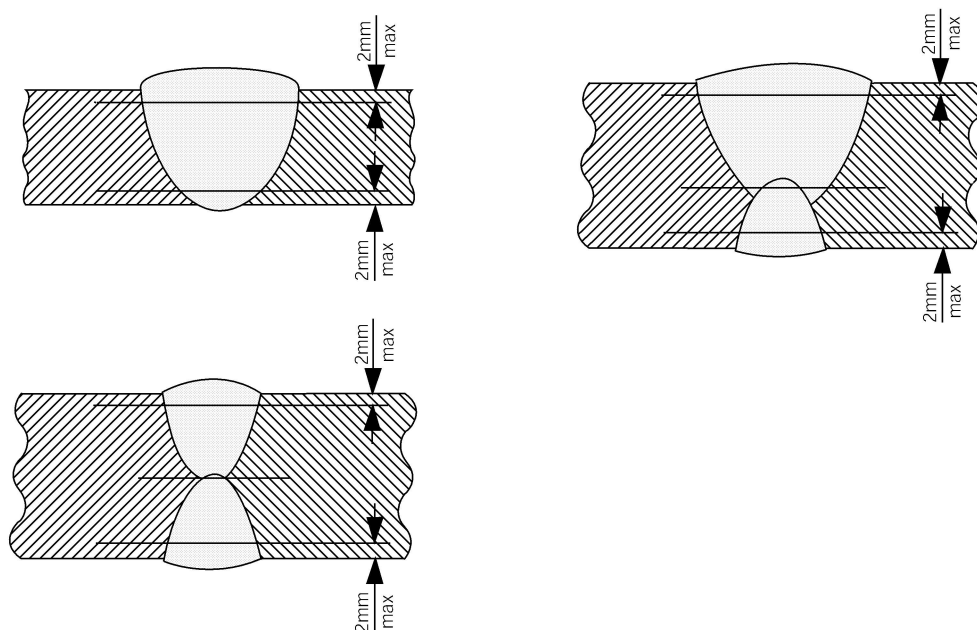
Examples of hardness test with rows of indentations (R) in butt welds
